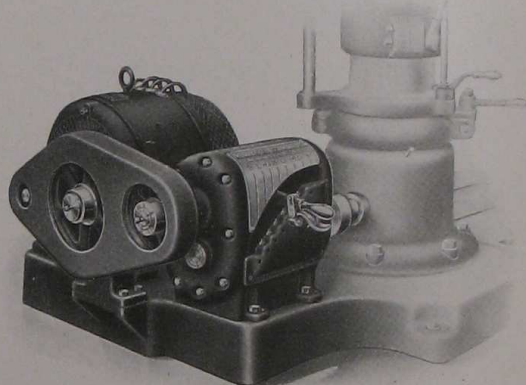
Constant Speed Motor Drive Thru Six Speed Box.
